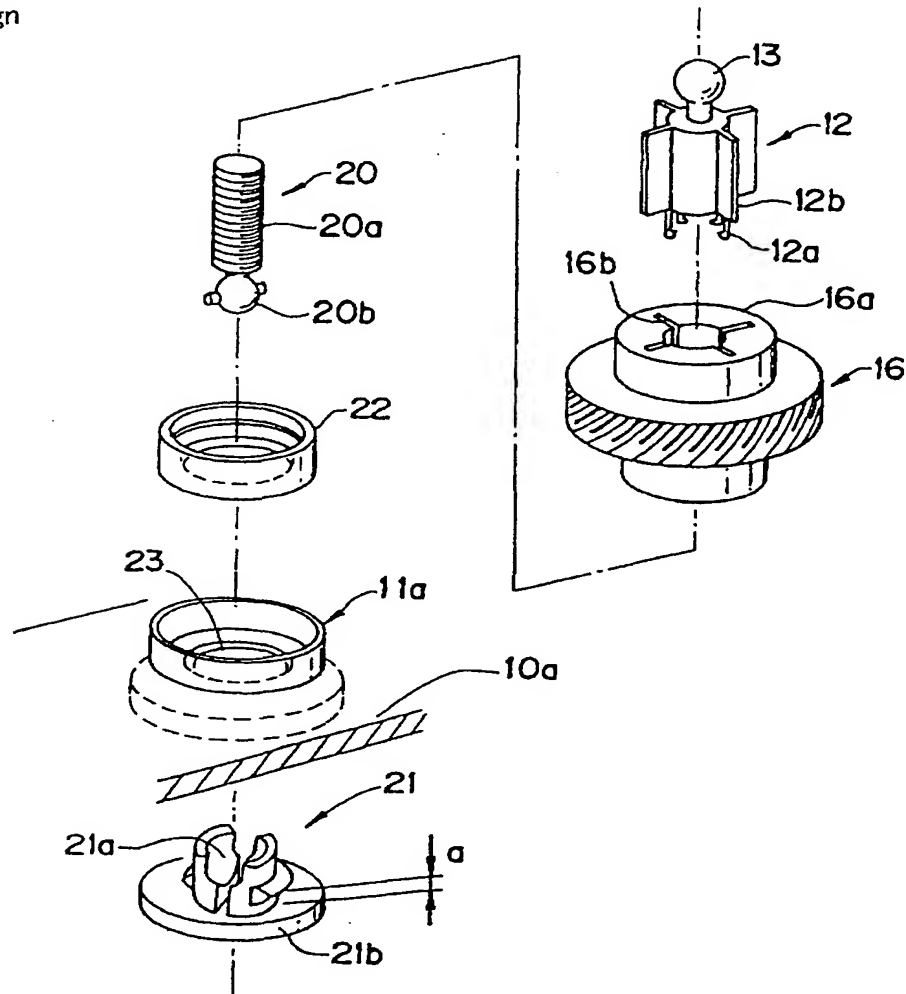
A perspective view of the disassembly of the major portion regarding to this design
